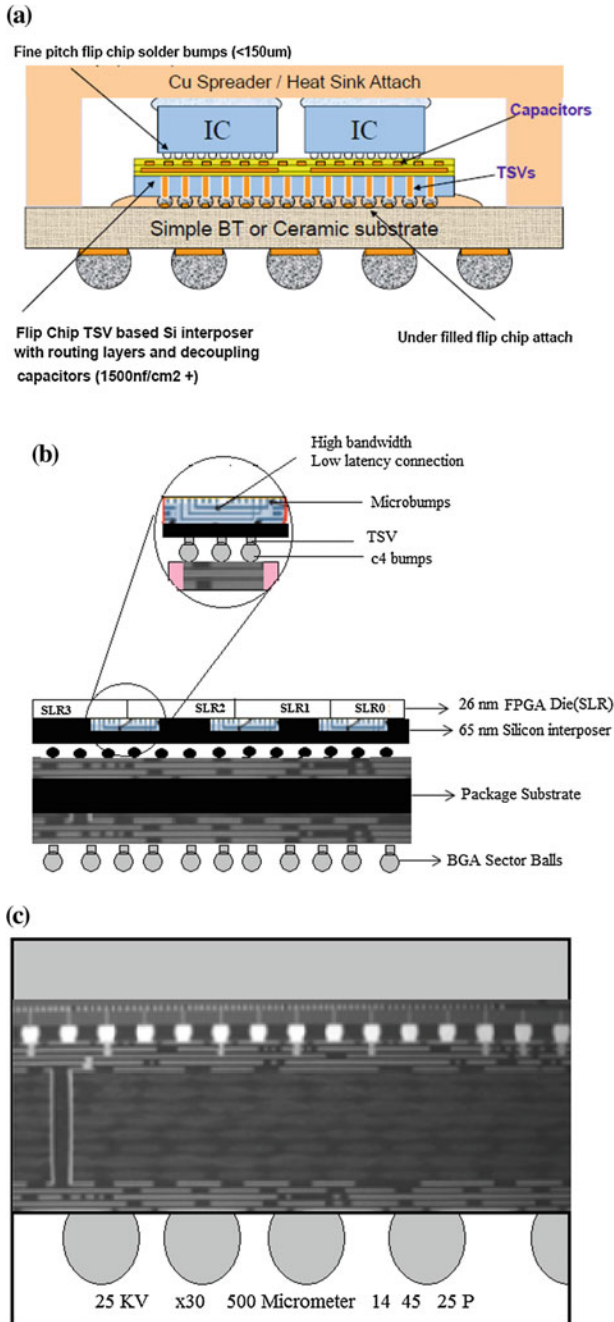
a Level of TSV interposer [6], b the schematic package configuration [1, 4, 10], c overall assembly of TSV interposer [1, 10]
